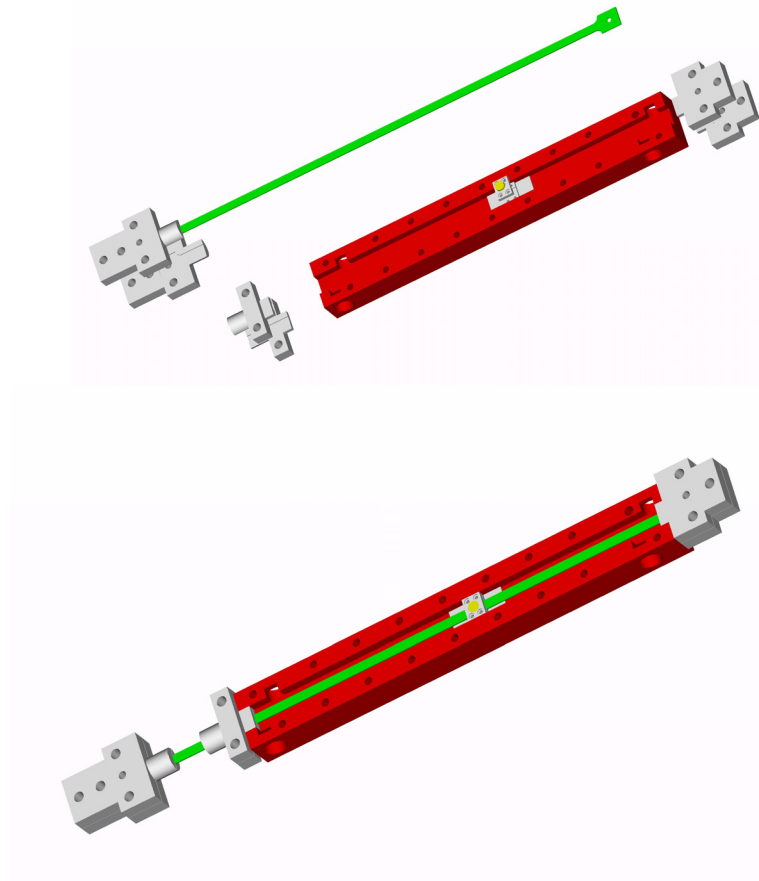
Final SMA actuator (Pro/Engineer drawings).
